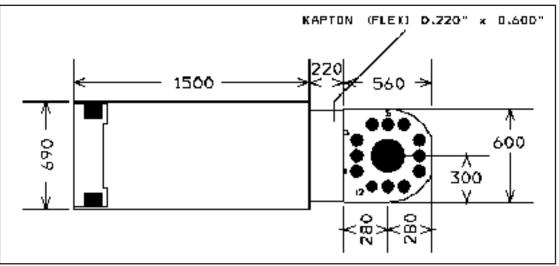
PA-230 Mechanical Dimensions, All Measurements in Inches
